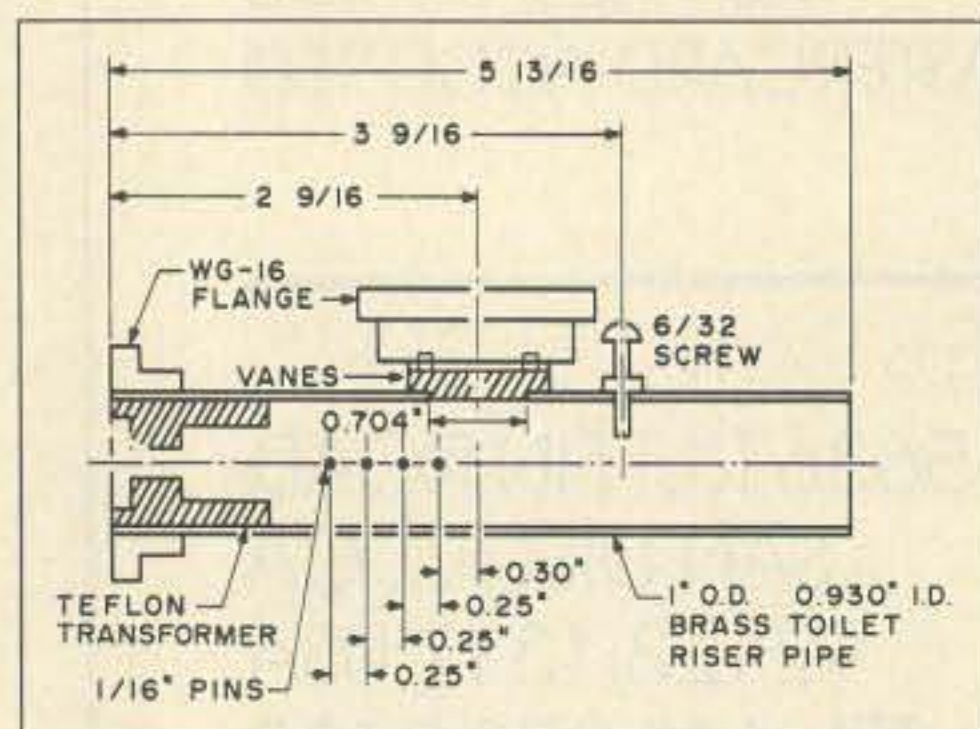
Cut-away profile of the circular waveguide, with the Teflon™ piece inserted.
